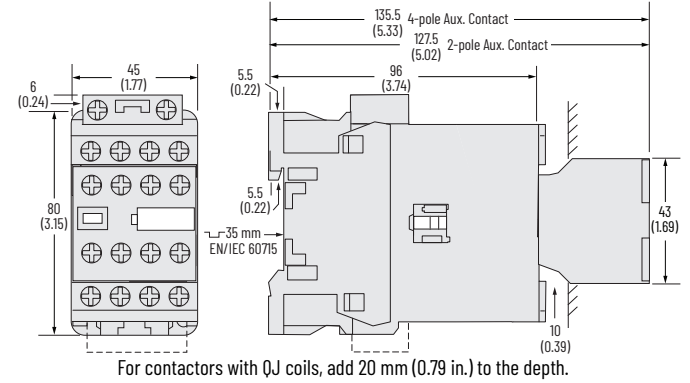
100-E26...100-E38 4-Pole Contactors with Standard Coils and Side-mounted Auxiliary Contact
